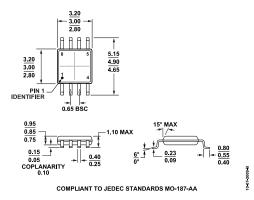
8-Lead Mini Small Outline Package [MSOP] (RM-8)
